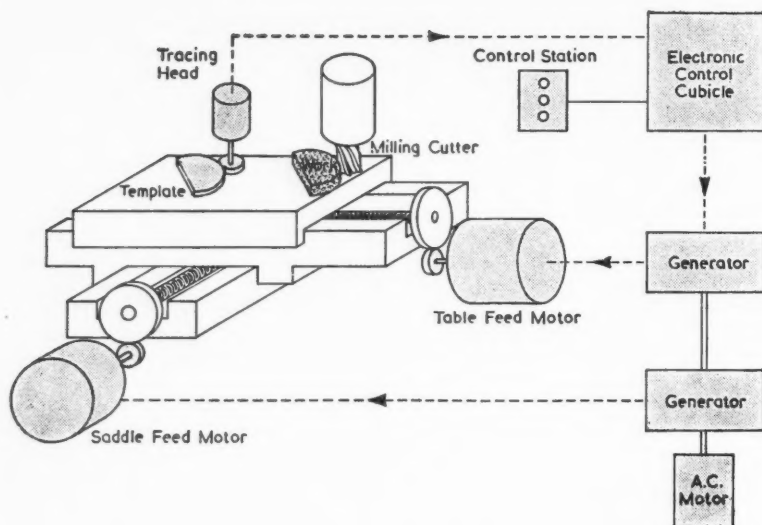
Schematic arrangement of tracer control of two dimensions for a vertical milling machine.
